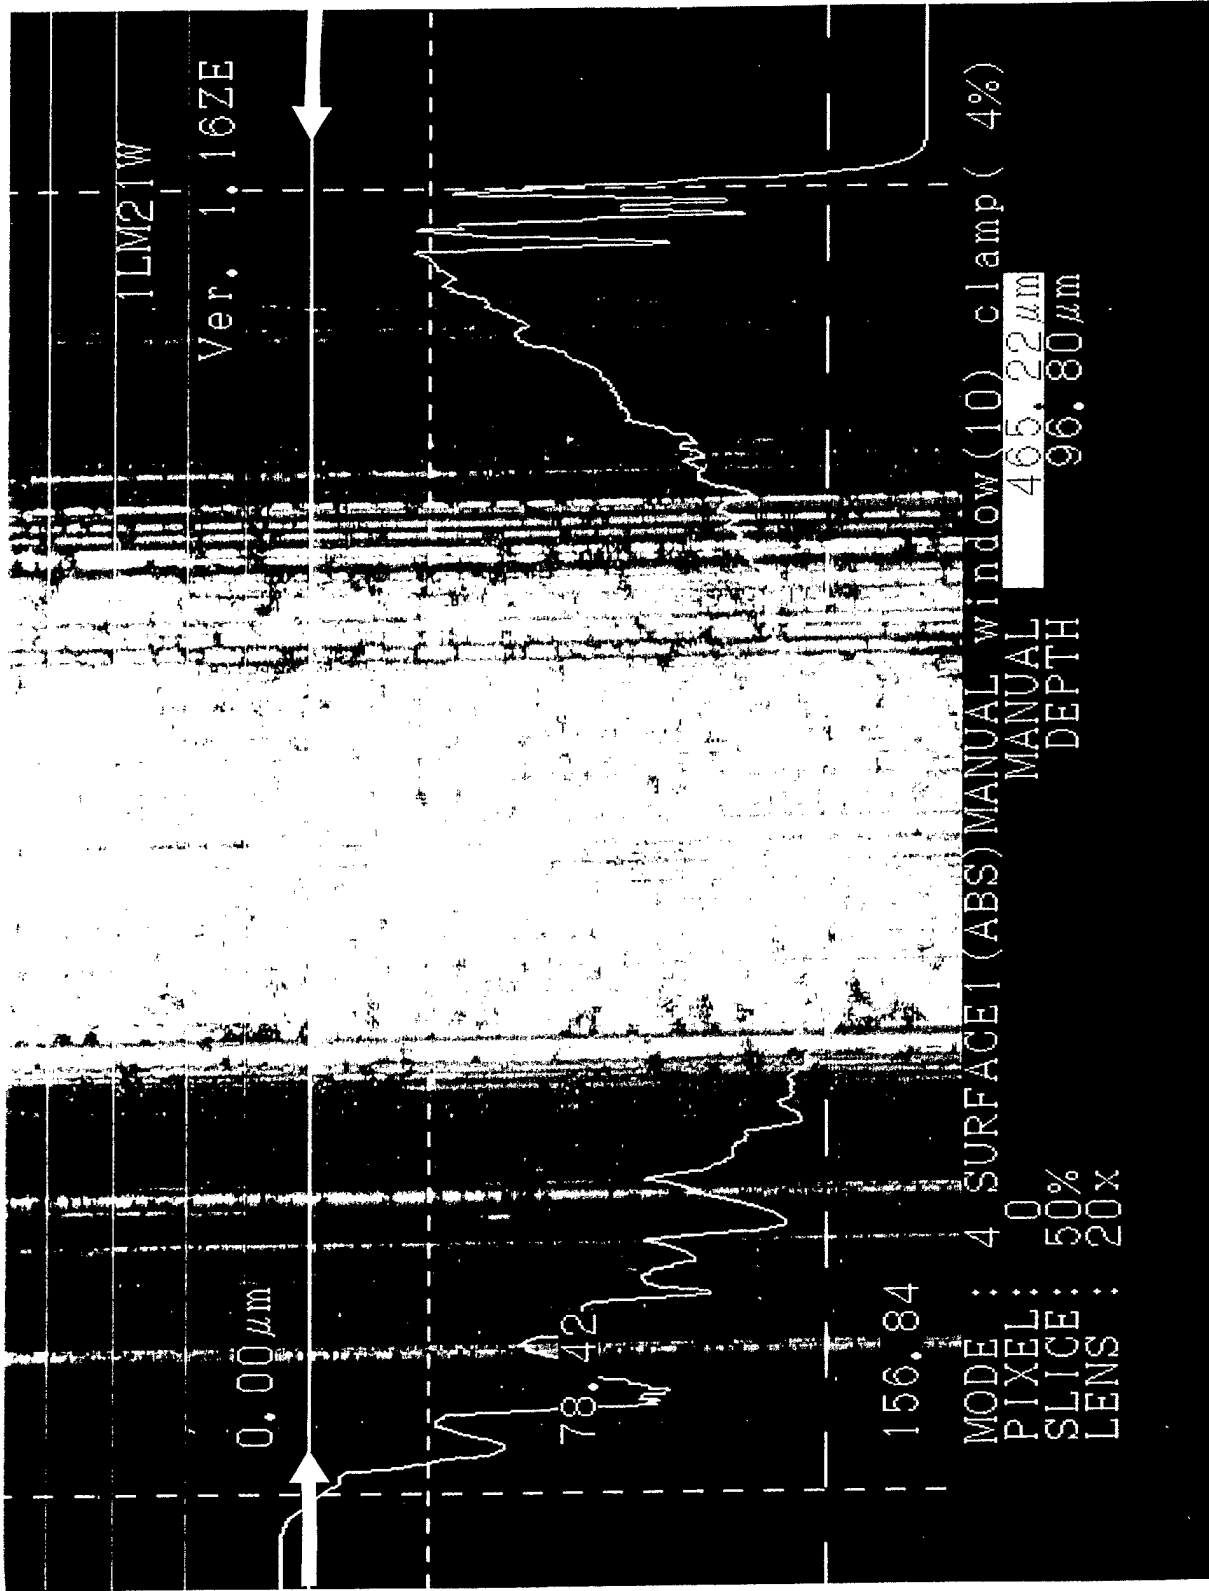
Lasertec Linear Scan Profile of SIK -00938 Rod Typical Thread Root (Mag. 500x).
